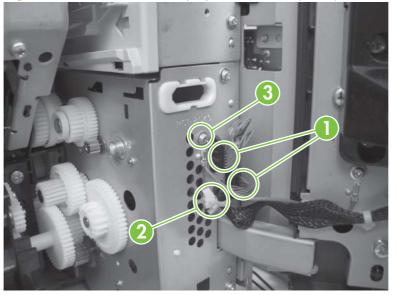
Remove the multipurpose drive unit (6 of 7)
